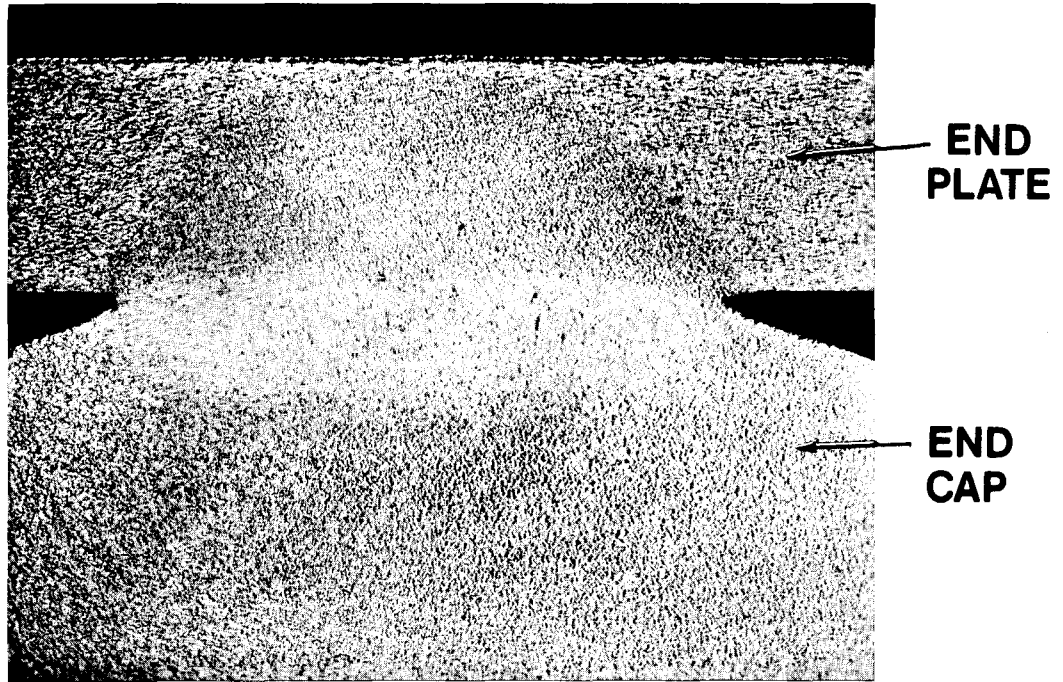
Cross Section of End Plate Assembly Weld
